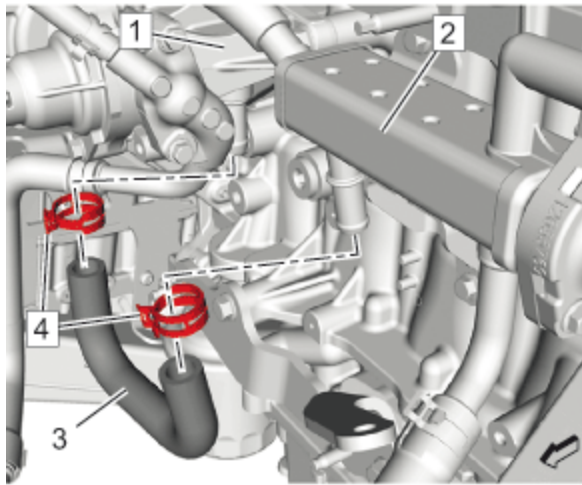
Exhaust Gas Recirculation Cooler Water Bypass Outlet Hose
